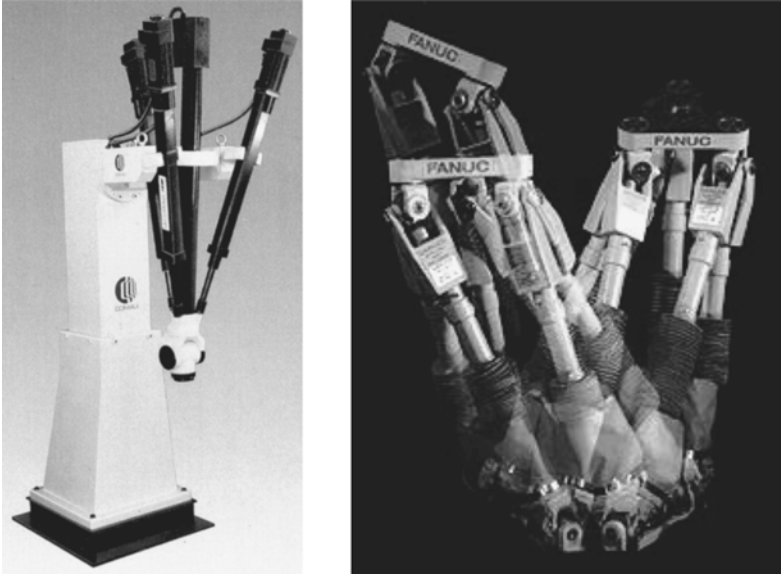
The COMAU Tricept, a six-DOF tripod and the FANUC FlexTool Steward platform with six servo-spindle modules connecting the bottom and moving plate. (Courtesy of COMAU and FANUC Robotics.)
